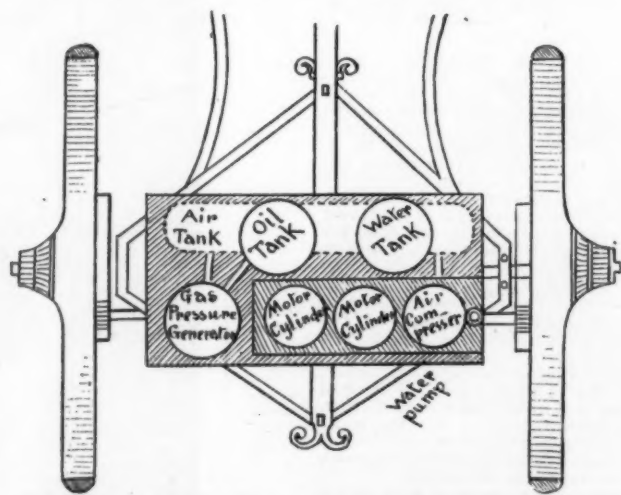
REAR END VIEW OF HORSELESS CARRIAGE.
